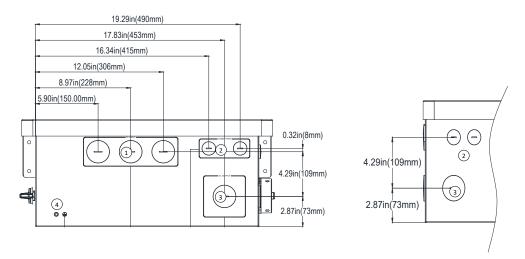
Conduit Knockout Locations on the Wiring Box
